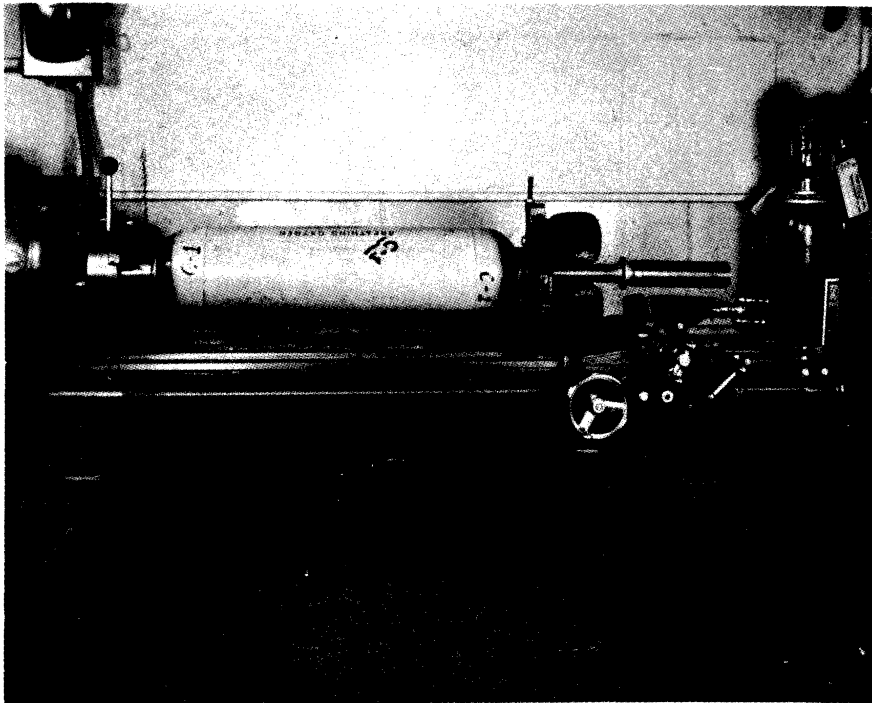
Photograph of Setup for Buffing the Inside of the Intake Tube. The sample bottle is rotated by the lathe; and the magnetron magnet, just to the right of the steady rest, holds the buffing brush stationary inside the intake tube.
